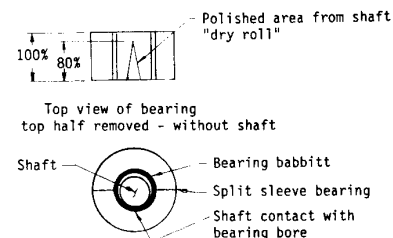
Minimum acceptable shaft-to-bearing-bore axial contact.
